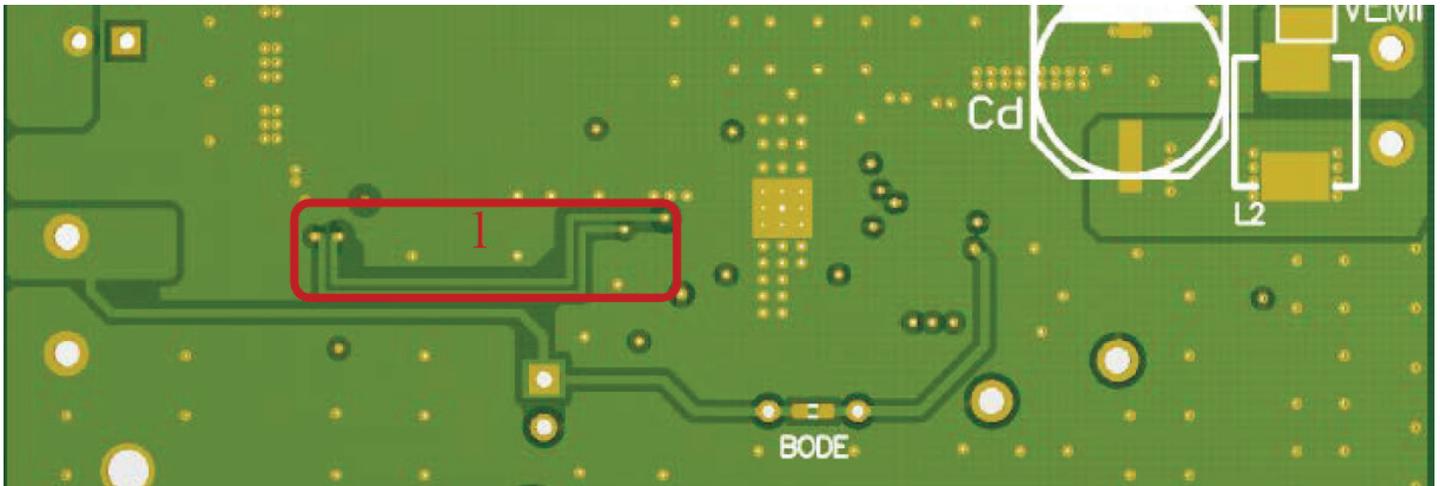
Example PCB Component Placement and Routing, Bottom Layer
